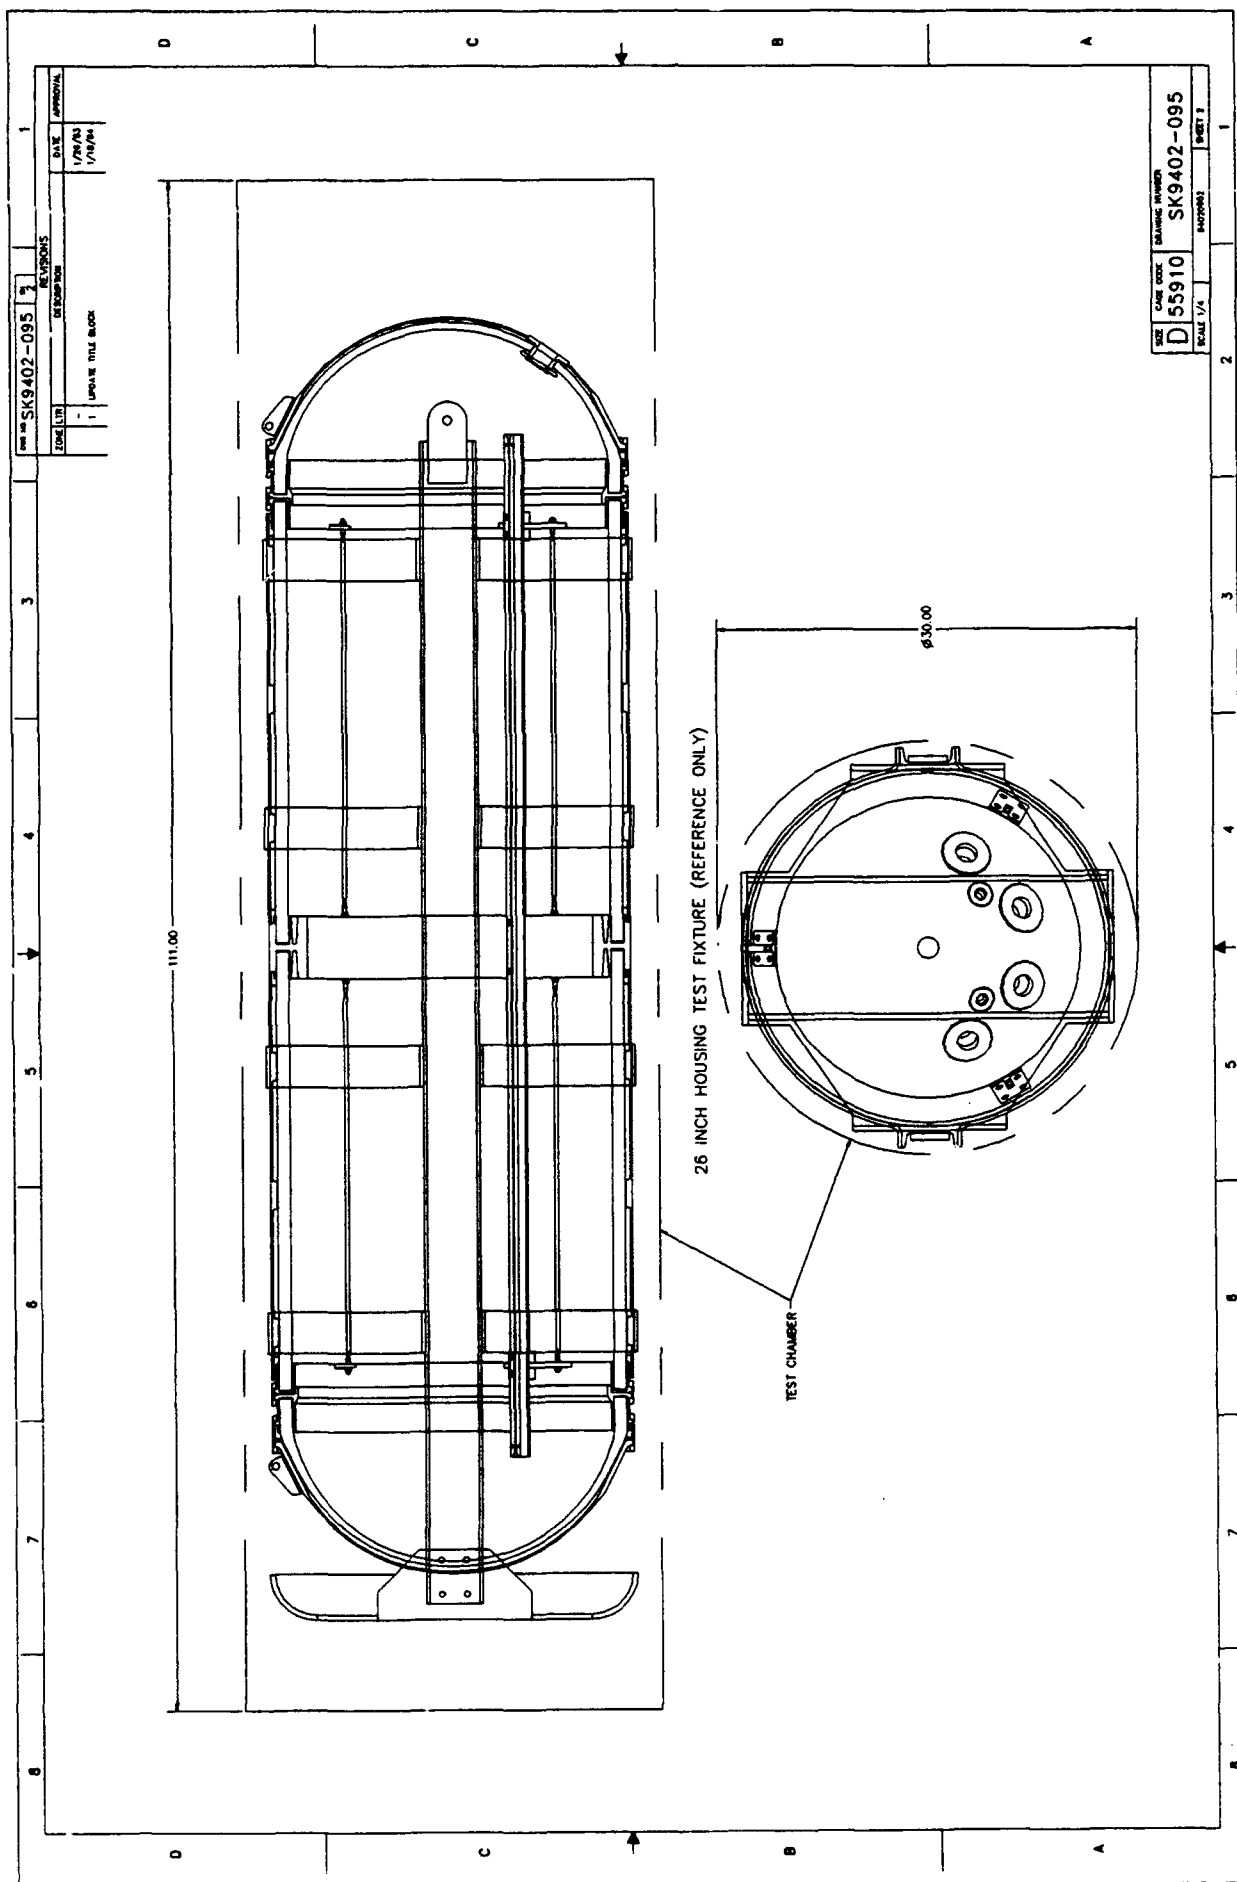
26-inch-housing pressure-testing fixture, sheet 2.
